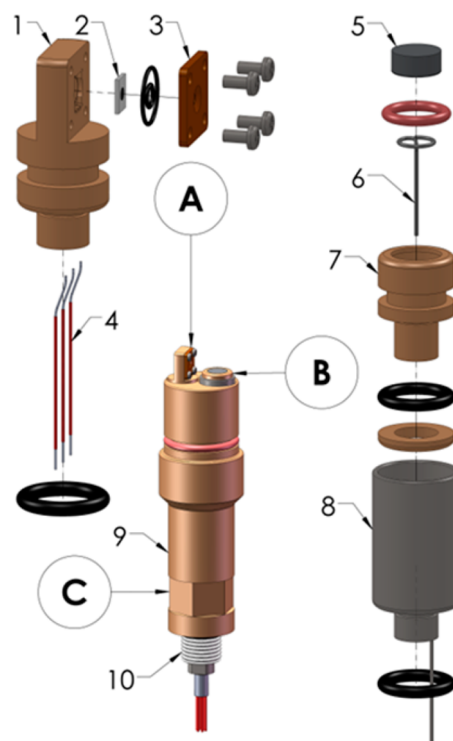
ISFET housing (1) holds the silicon die (2) which is sealed with two O-rings and a cover (3). Three silver wires (4) make contact with gold pads on the back of the die. The AgCl reference pellet (5) and connecting wire (6) are bonded into housing (7) with silver conductive epoxy and then screwed into the Ti counter electrode (8). The assembled ISFET sensor (A) and reference and counter electrodes (B) are then mounted in a PEEK stem (9) which mounts on a pressure housing with a stainless steel connector (10).
